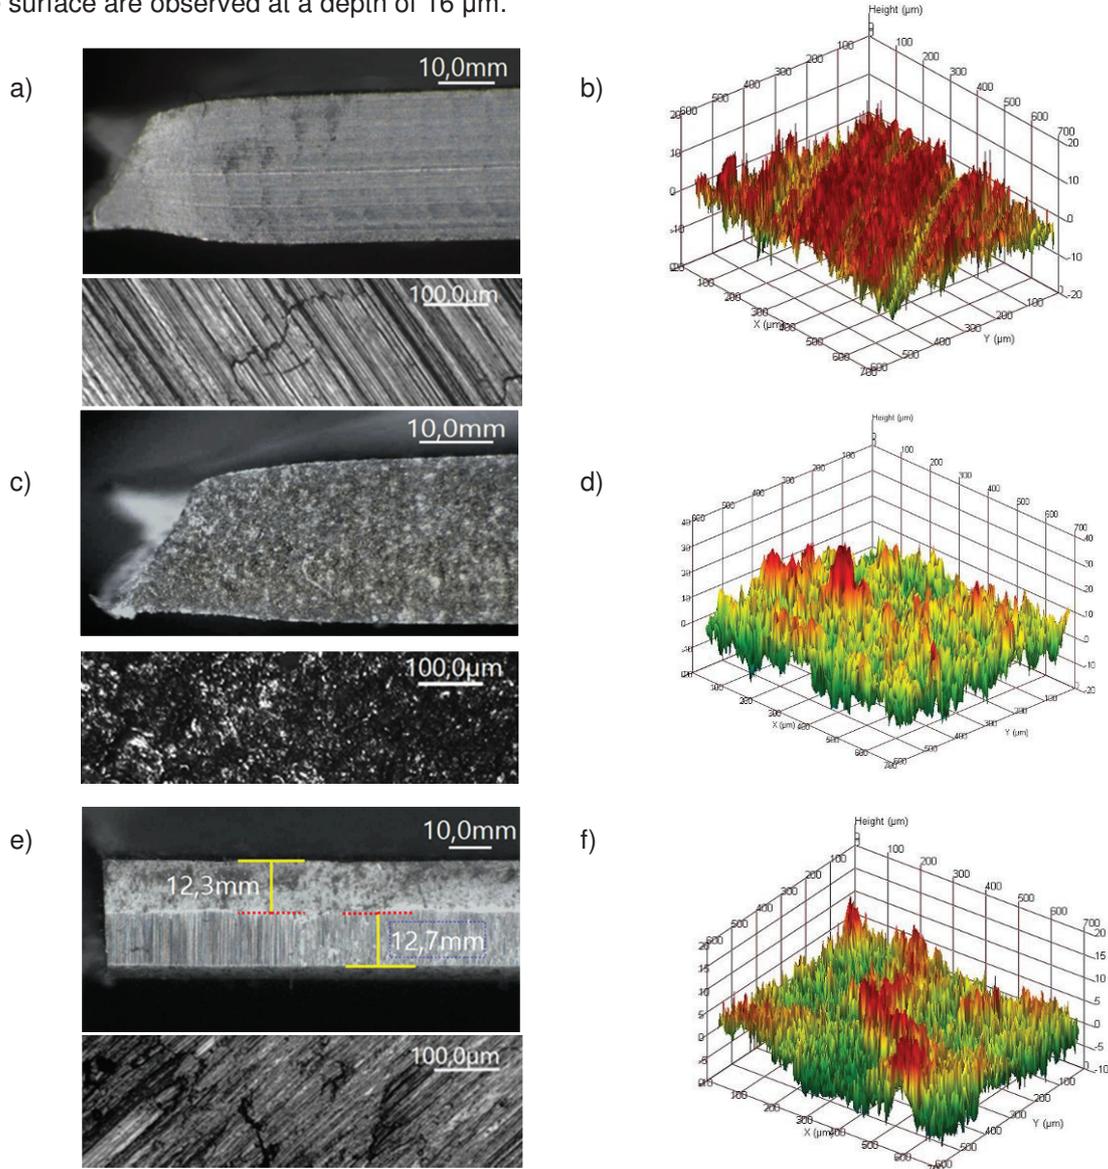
Macro and microstructure of investigated samples together with its topography: a, b - after milling; c, d - after electro discharge machining; e, f - after blanking die
